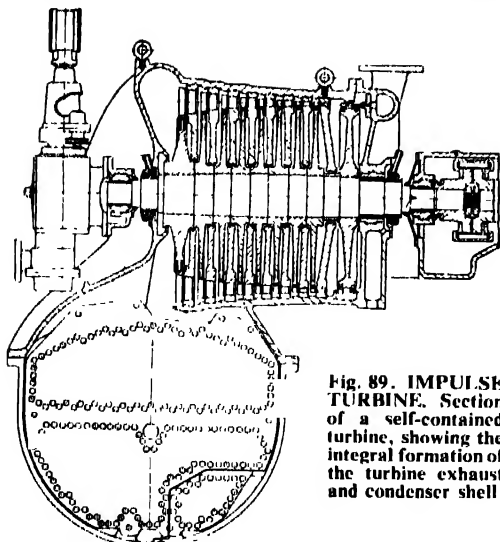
IMPULSE TURBINE. Section of a self-contained turbine, showing the integral formation of the turbine exhaust and condenser shell
